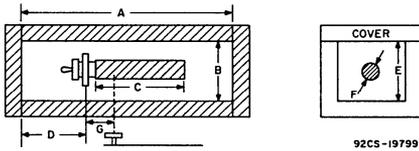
Drawing (inside view) of oscillator, showing dimensions.
